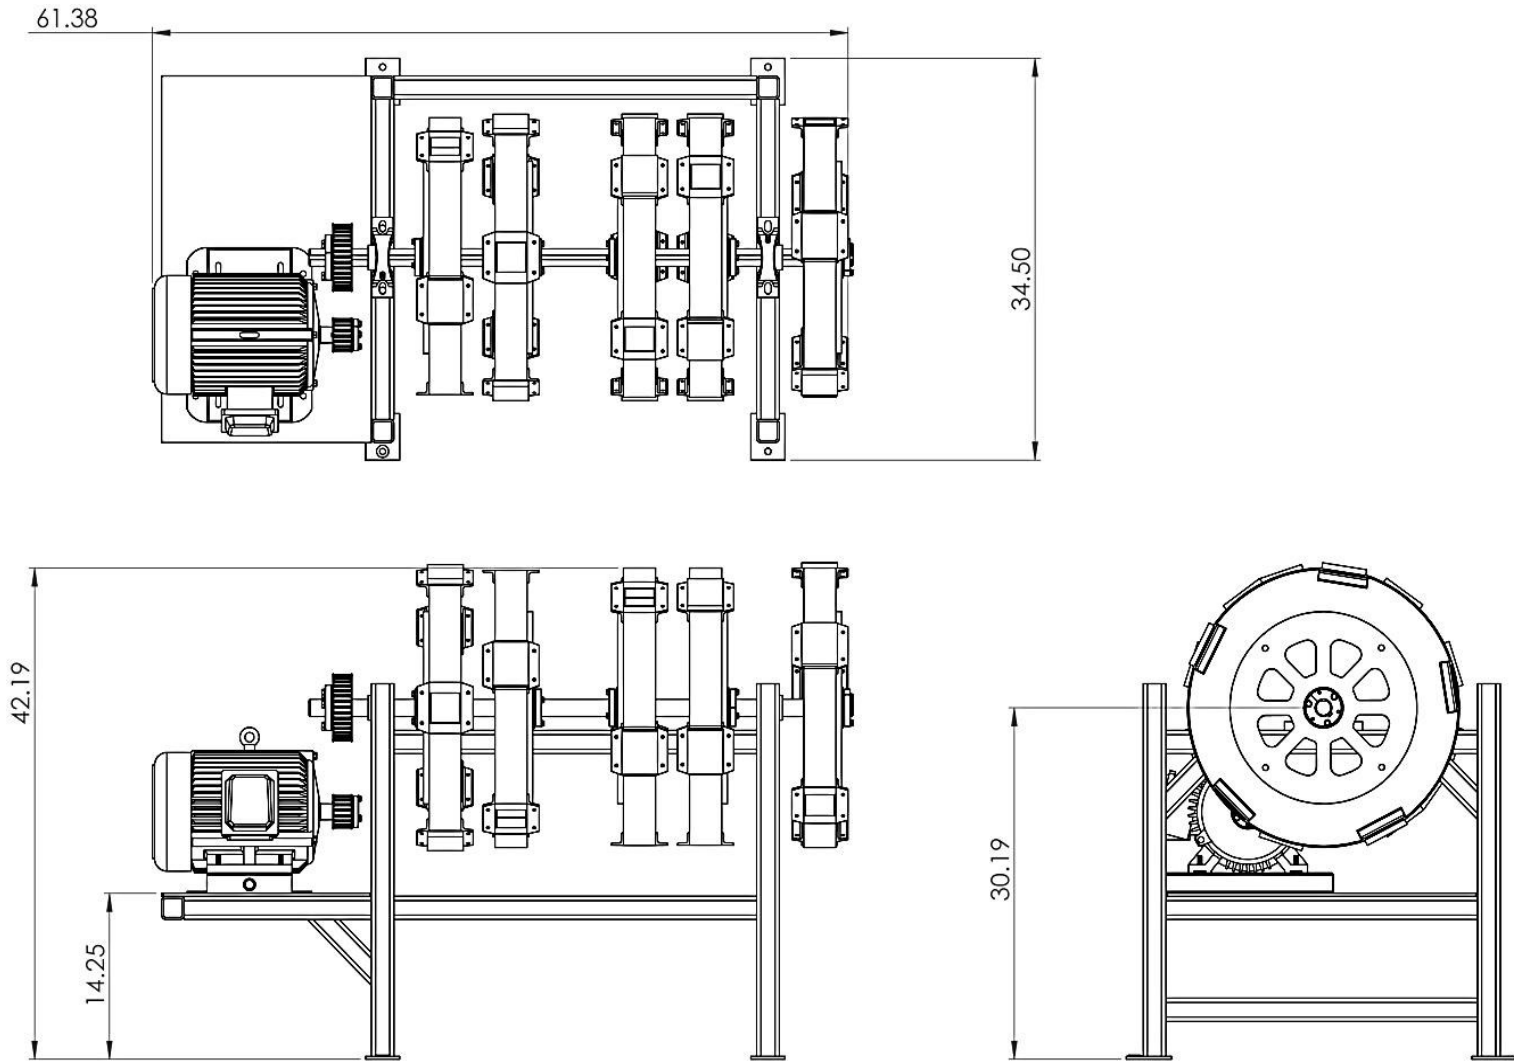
Detailed drawing of the TWT assembly (Dimensions are in inches)
